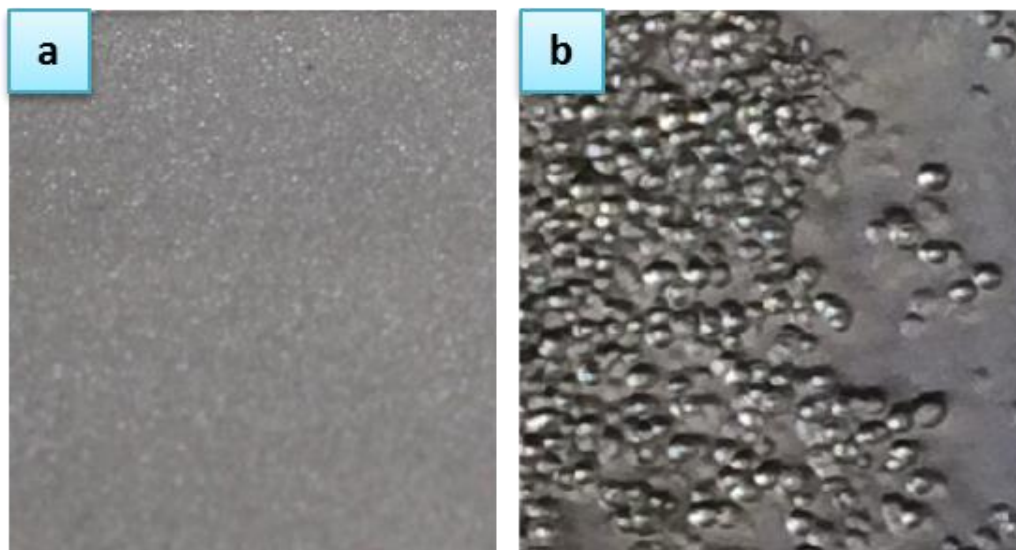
[a] part surface immediately after the EBM process which shows no indication of defects [b] defects revealed after the part has gone through HIP treatment and chemical milling
